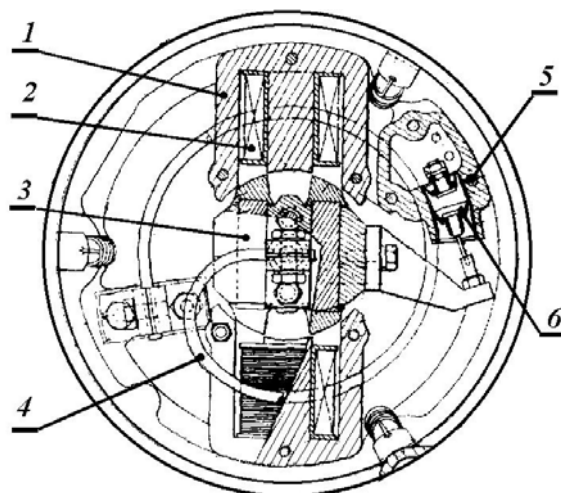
Compressor driven by oscillating rotating electrical motor; 1 – stator's core, 2 – winding, 3 – rotor, 4 – spring, 5 – cylinder, 6 – piston
